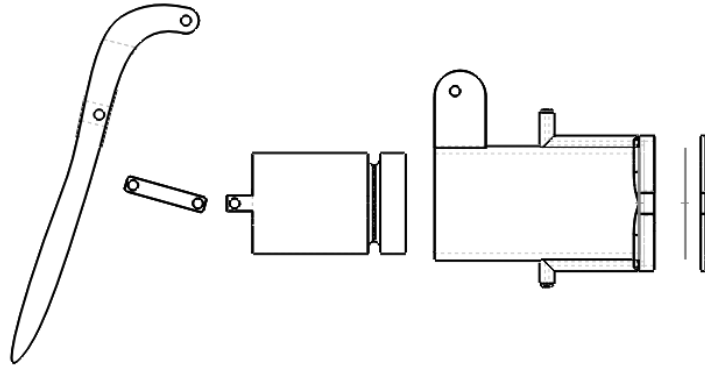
Exploded view of Pump Assembly, original drawings and mate
